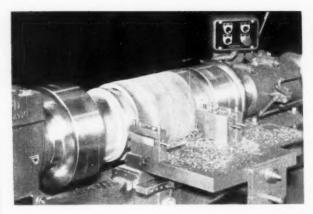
Special lathe using two sets of air chucking equipment for holding large engine cylinder liners.
